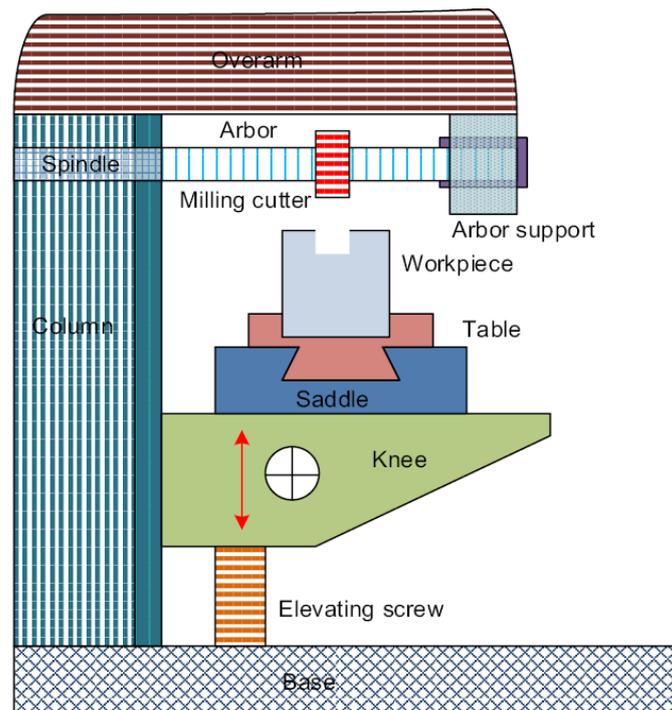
Schematic diagram showing column and knee type horizontal milling machine for peripheral machining of a slot.
